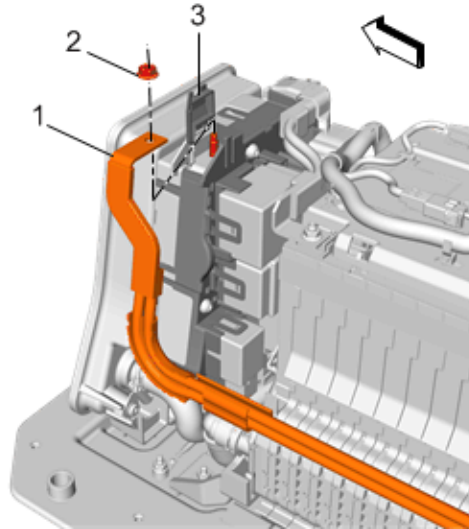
Terminal Cover, High Voltage Battery Positive Cable And Fastener
